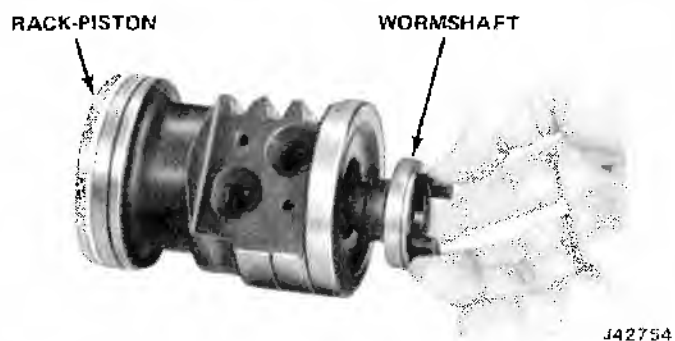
Inserting Worm Shaft In Rack-Piston Nut
